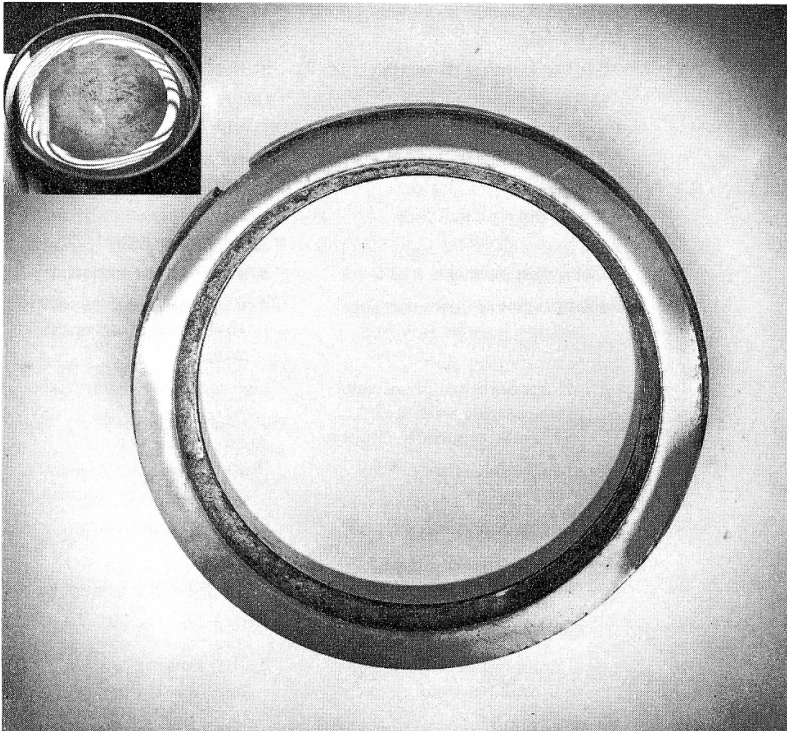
Tungsten carbide mechanical seal face showing localised polishing due to lack of flatness; this seal leaked badly. The inset illustrates a typical non-flat seal face viewed in sodium light using an optical flat to give contour lines at 11 micro-inch increments of height
